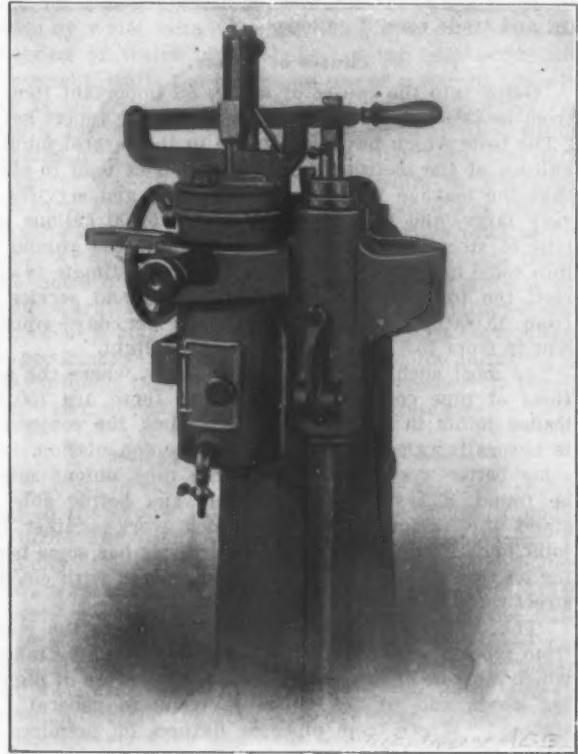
Rear View, Showing the Mechanism Actuating the Pump and Choker.
